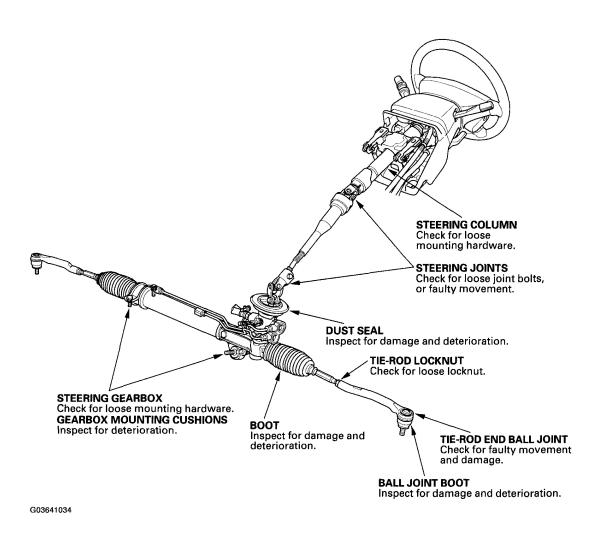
Identifying Steering Linkage Components Courtesy of AMERICAN HONDA MOTOR CO., INC.
